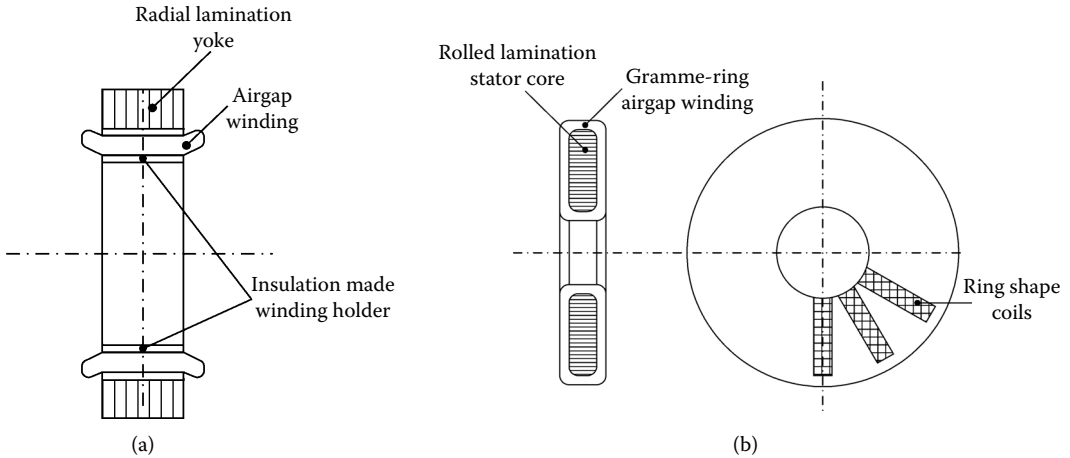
Airgap windings: (a) for cylindrical rotor and (b) for double-sided disk-shaped rotor.
